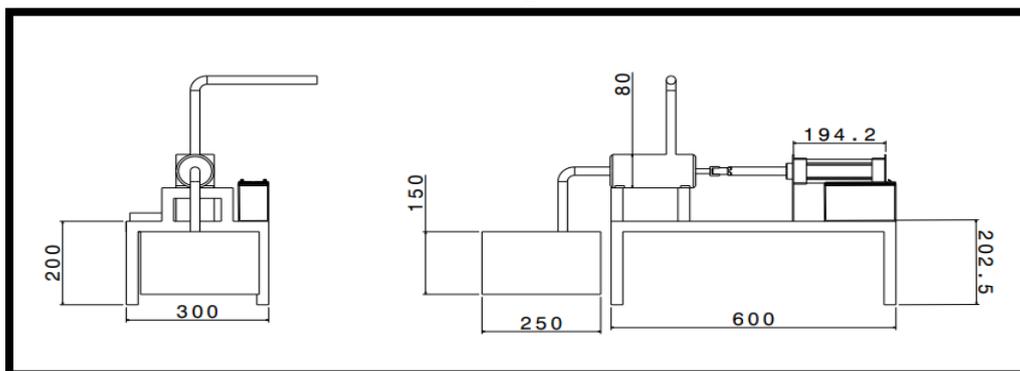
Front and Side View Automatic Pneumatic Water Pumping System
